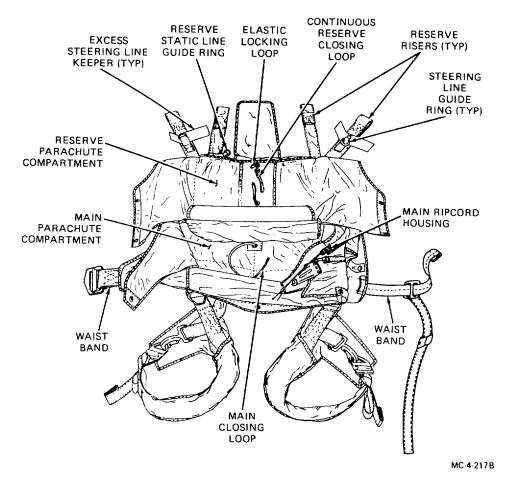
Container and Harness Assembly. (Sheet 1 of 2)
